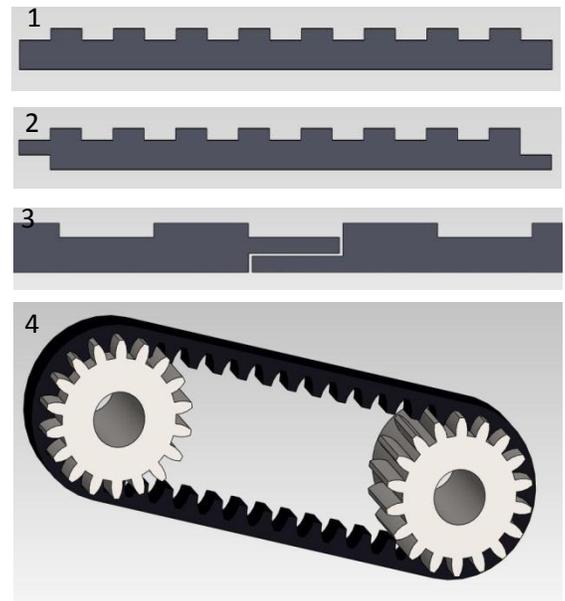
This shows the steps for making a belt of the correct length. The length is determined by wrapping the belt around both pulleys and taking out the slack. Now, cut the belt just after the teeth on both ends, as shown in 2. Using a box cutter, shave off the top half on one end and the bottom half on the other end, as shown in 3. Finally, bring both ends together and secure them with super glue gel, as shown in 4. The final belt should fit snugly around both of the pulleys.
